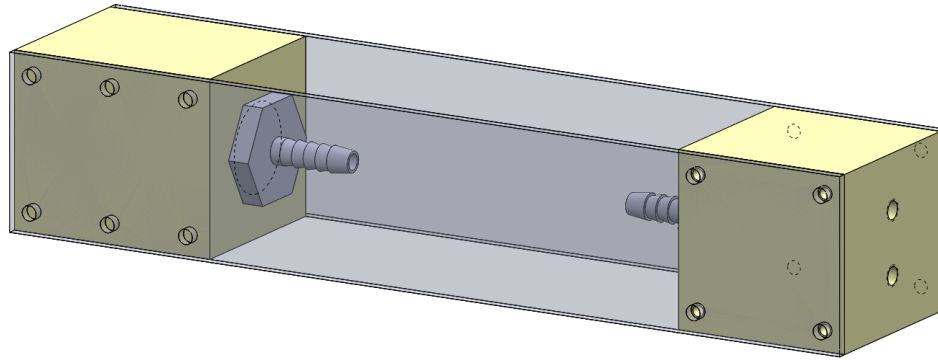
3D CAD rendering of the closed volume subassembly for mounting an engineered or actual blood vessel.
